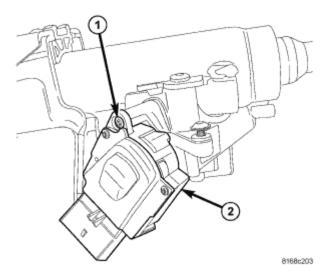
Identifying Ignition Module & Mounting Screw Courtesy of CHRYSLER LLC
